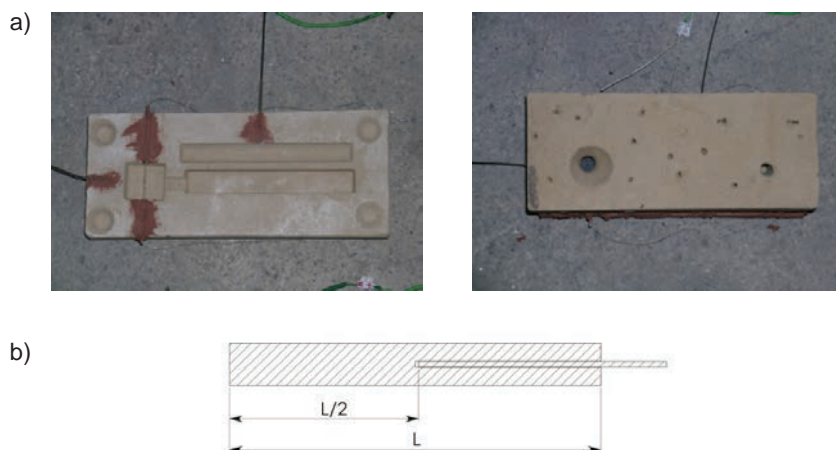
Layout of the measuring thermocouples in mould during metal pouring (a); general view of the measuring thermocouple assembly in standard reference sample for the heat treatment process (b)
